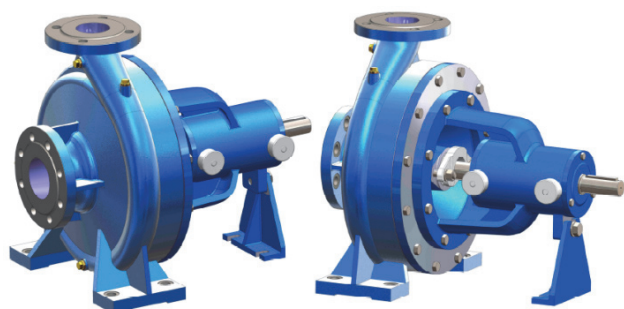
Three-dimensional model of the pump assembly NNm 65-315 [16]
